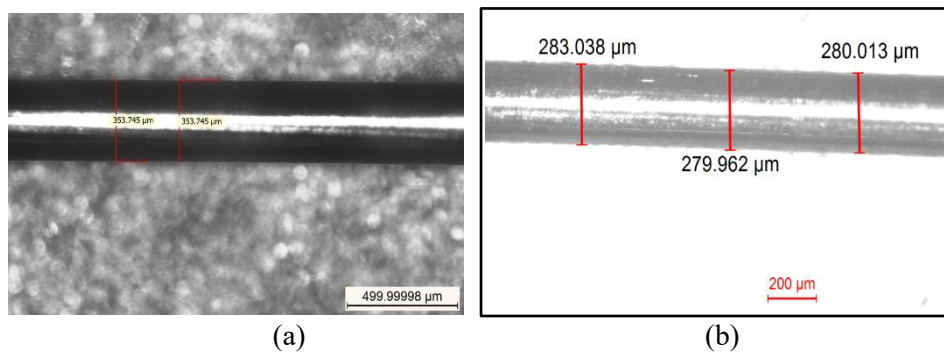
Pictorial view of glass workpiece taken using DINO-microscope
